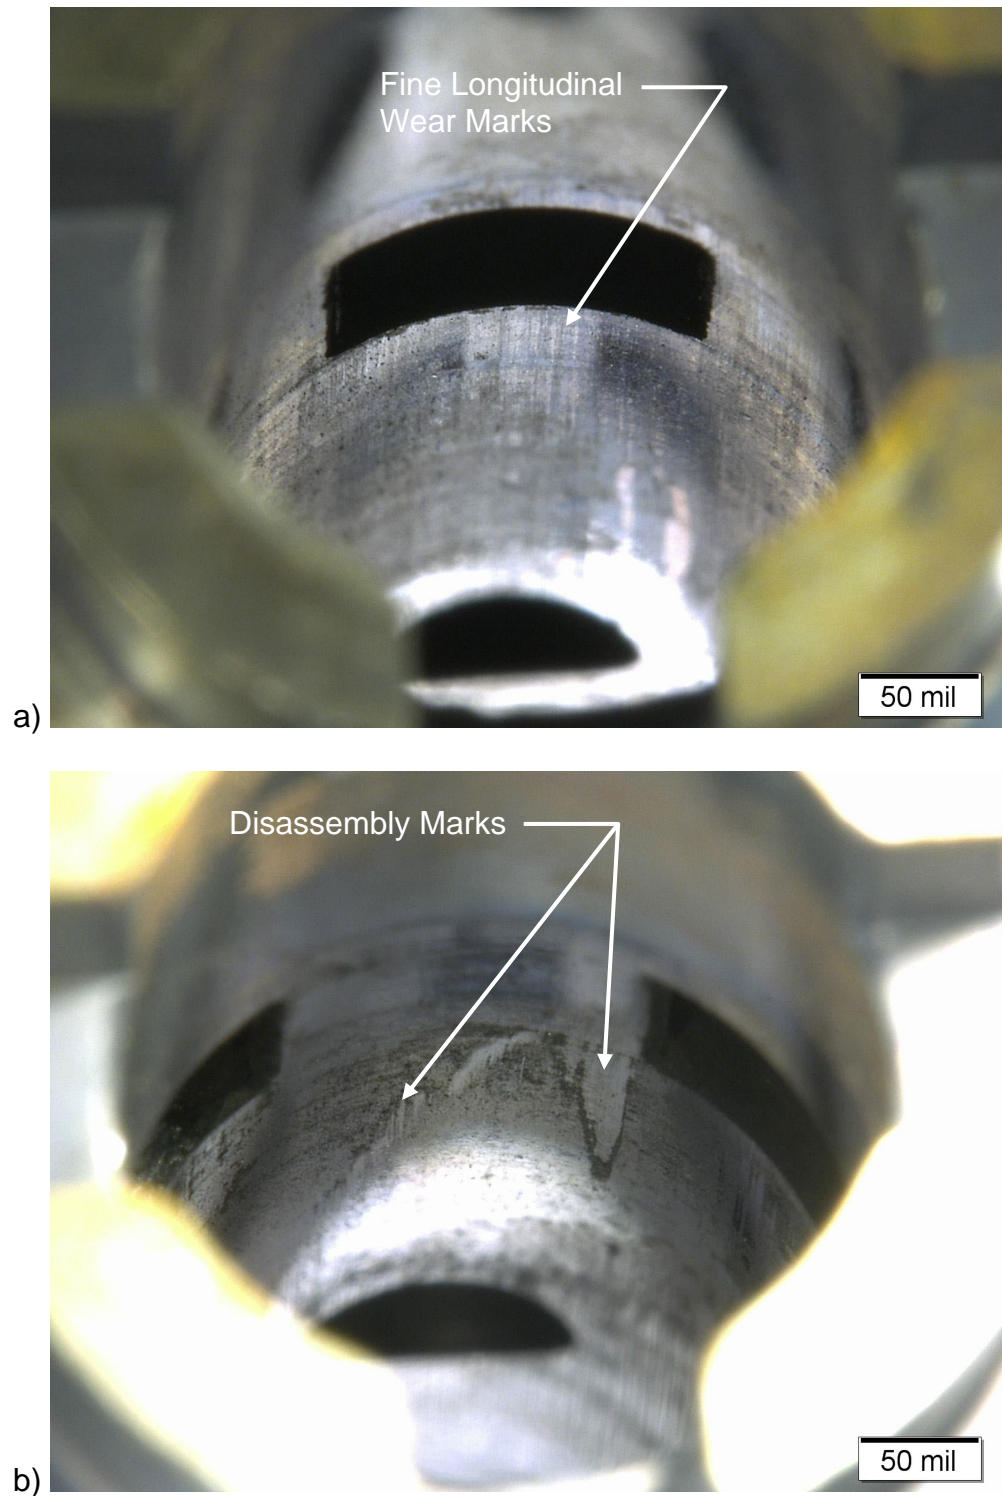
Micrographs of the Number 2 engine pilot valve sleeve inner cylinder. The micrographs were taken at the right end of the sleeve; a) fine longitudinal wear marks and b) disassembly marks.
